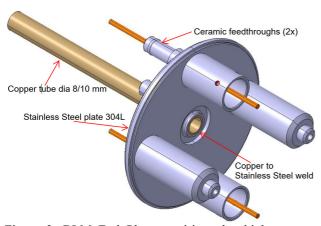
BLM End Plate requiring ultra-high vacuum compatible welds of copper to stainless steel (SS) and SS to SS.
